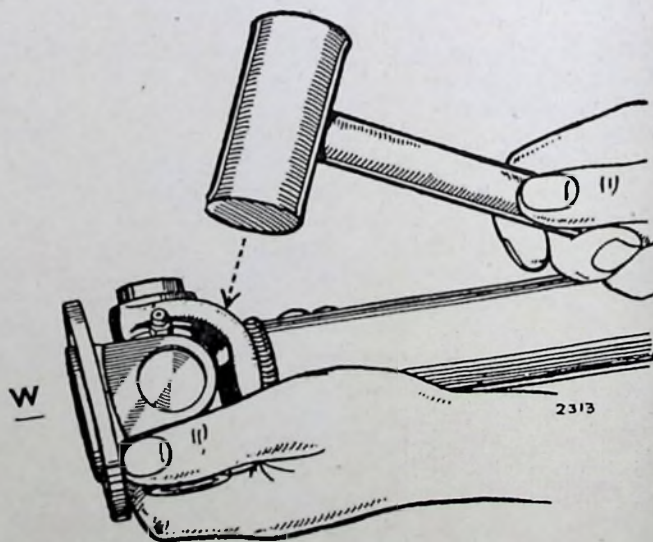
To extract the bearing after removal of the snap ring, tap on the ears of the yoke with a copper hammer.
